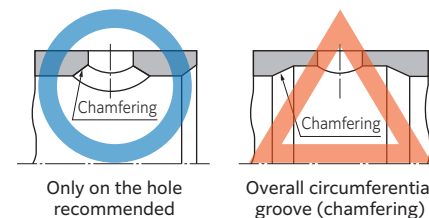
Chamfering of re-lubricating hole on the housing
